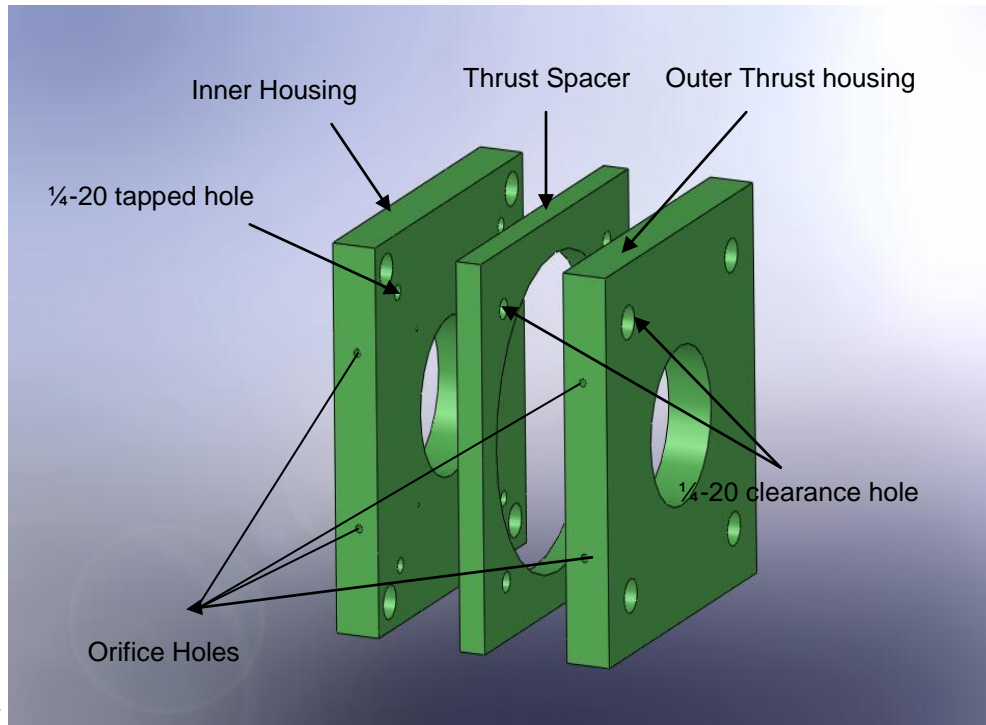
thrust bearing inner housing, spacer and outer housing exploded view
